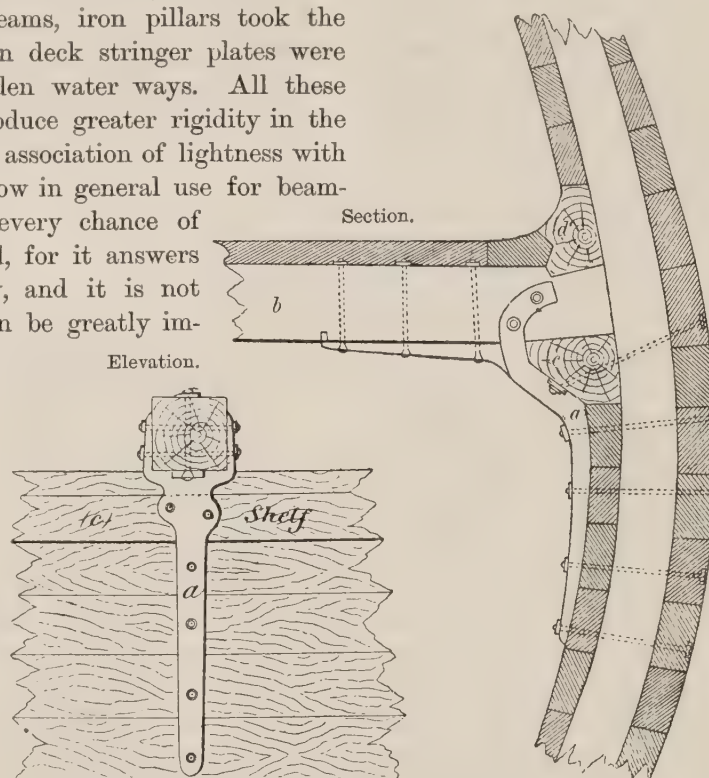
CONSTRUCTION OF A WOOD BEAM KNEE.
